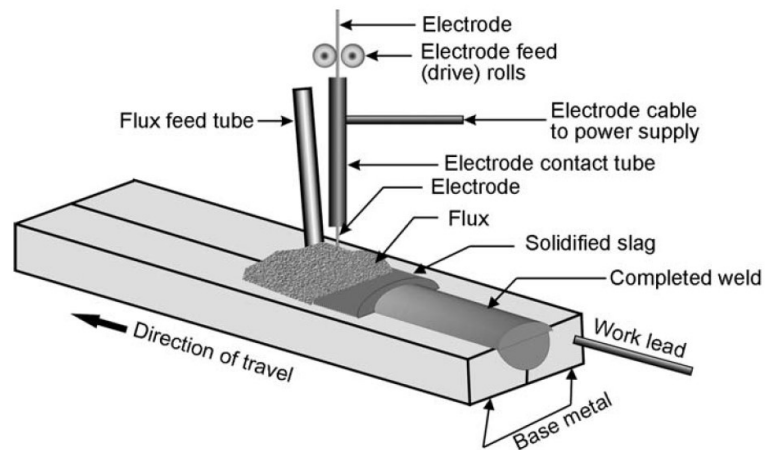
Schematic of Submerged Arc Welding Process ⁶⁴.
